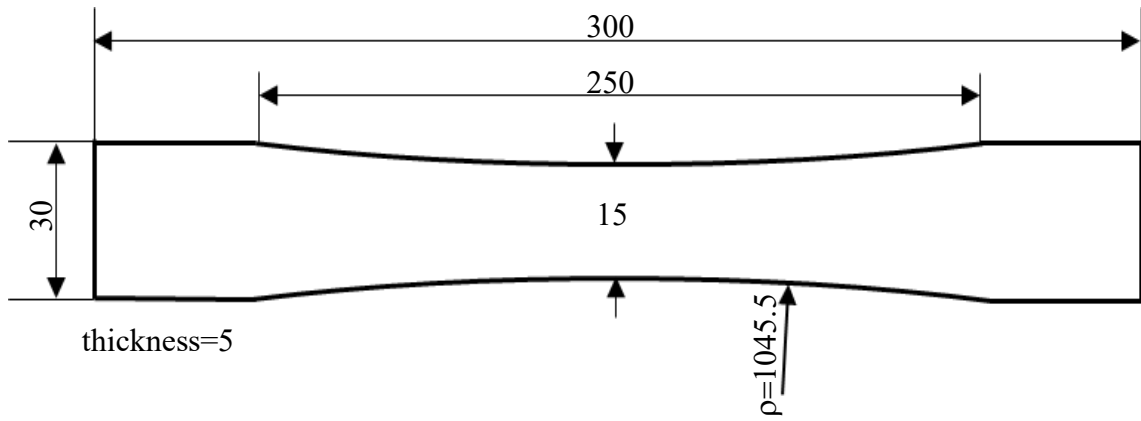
Hour-glass shaped specimen geometry, dimensions in mm
